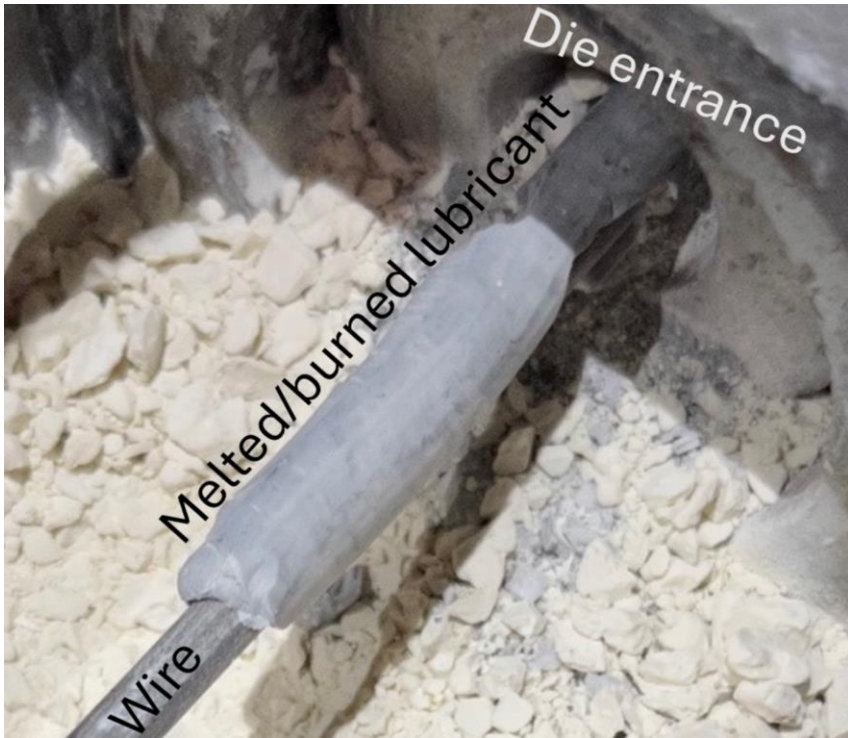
1. Blockage in form of a pipe consisting of melted/burned lubricant at die entrance preventing fresh lubricant from entering the drawing die.
